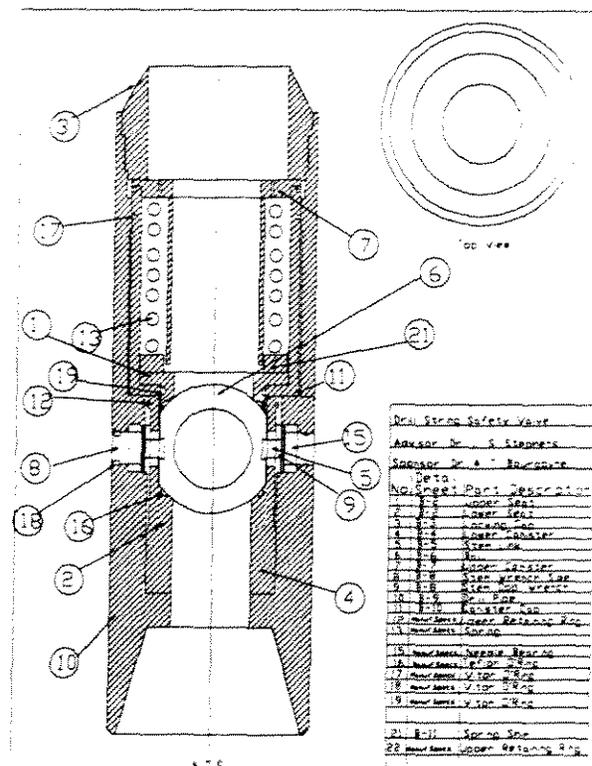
LSU Prototype Low Torque Drill String Safety Valve, 6 3/8" OD x 2 1/4" ID.
